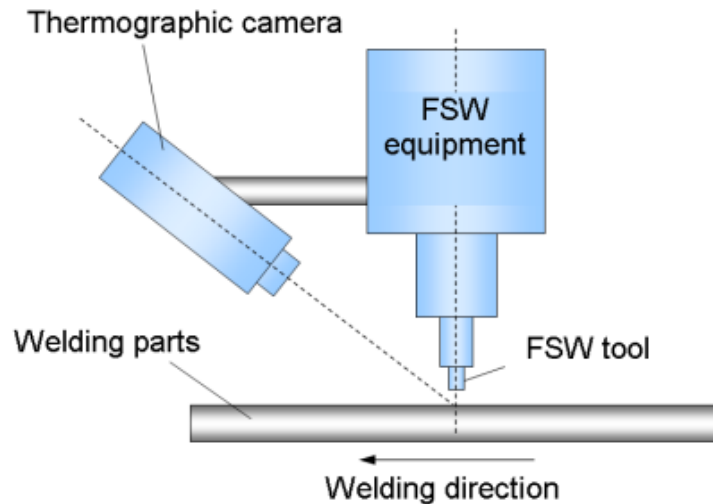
12 Scheme of positioning for thermographic camera on FSW machine
